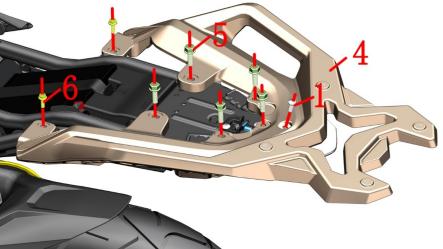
REAR COVER COMPONENT		Rear rack	CHK	(0)
